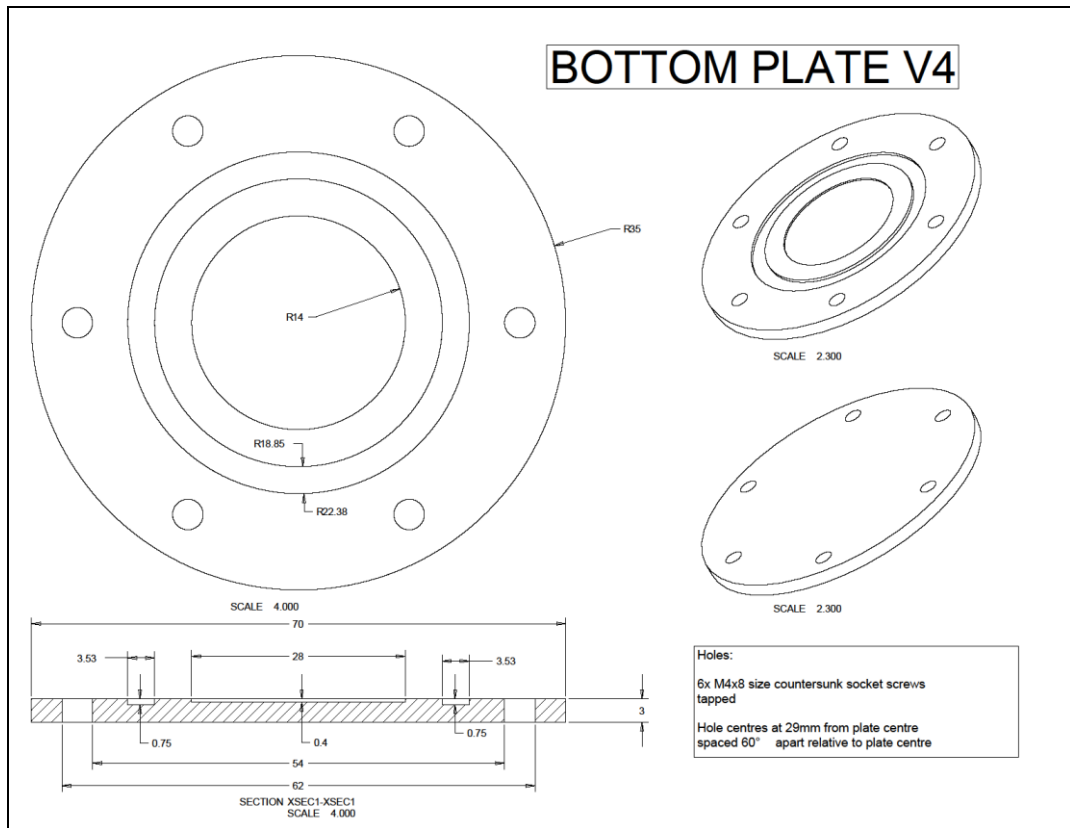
Design drawing for ALD mask bottom plate V4 (dimensions in mm)
